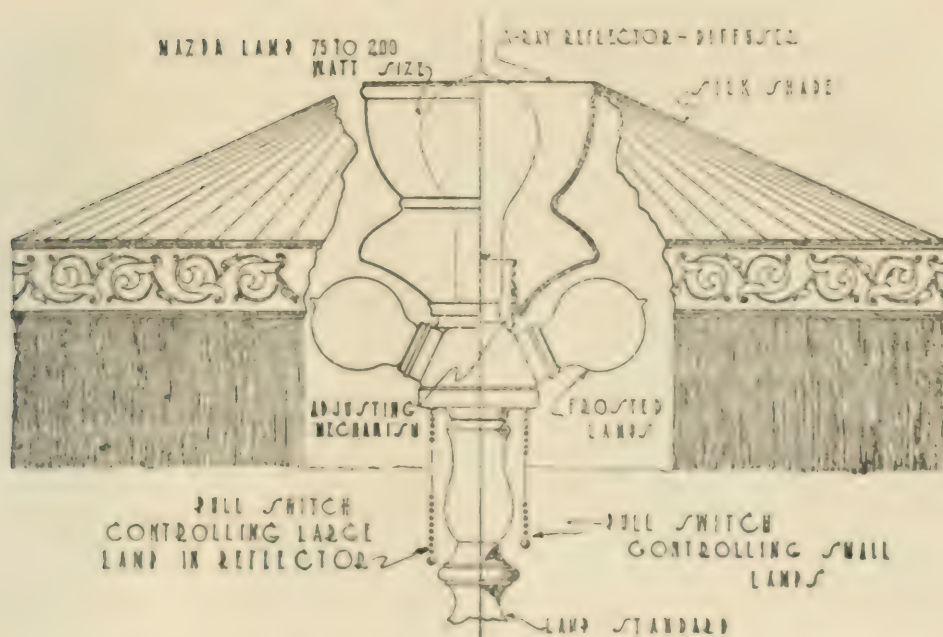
Details of a new type of indirect portable lamp suitable for illumination of dining rooms and restaurants.
